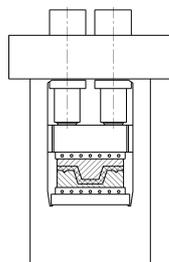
Compression moulding machine shown with mould closed and moulding material formed into shape
